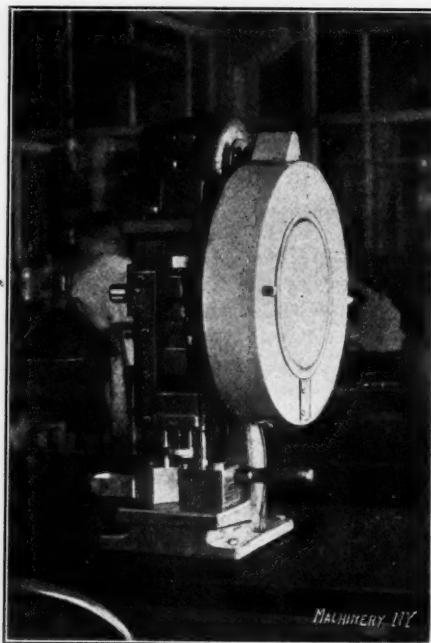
Guard over Pinion and Gear of Motor-driven Press
